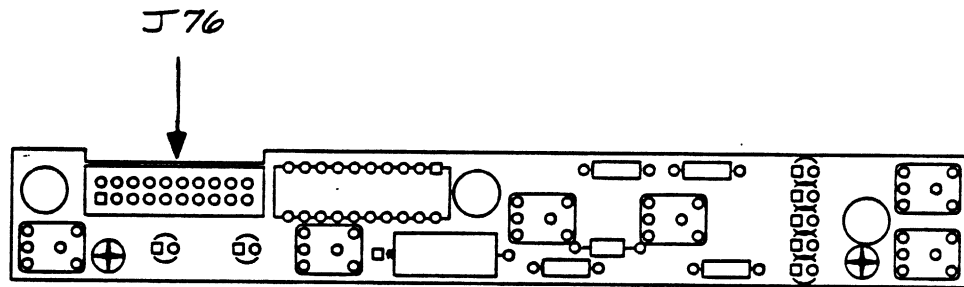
Connector location for the removal of the A5A9 Top Front Panel Board.
